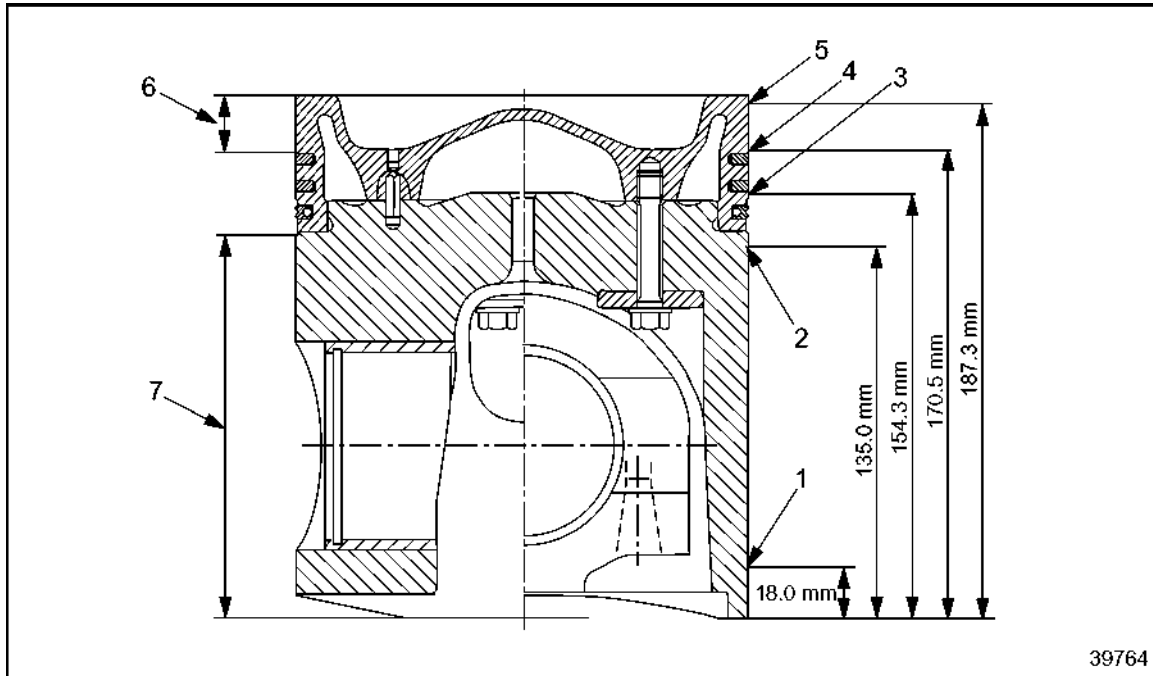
Piston Clearance in Cylinder Liner, Without Scraper Ring
